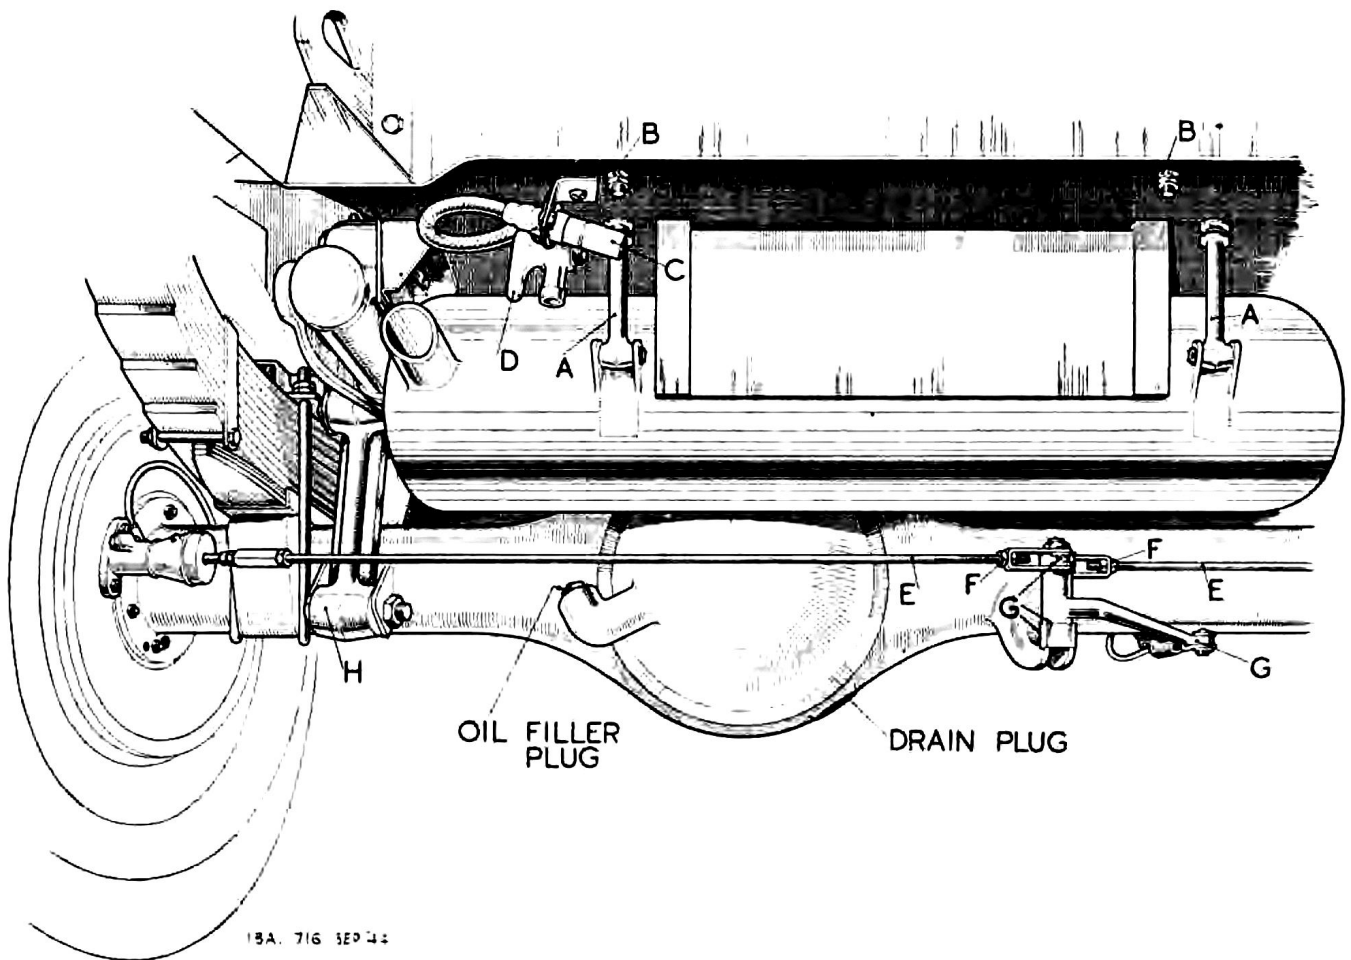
REAR BRAKE TRANSVERSE RODS
